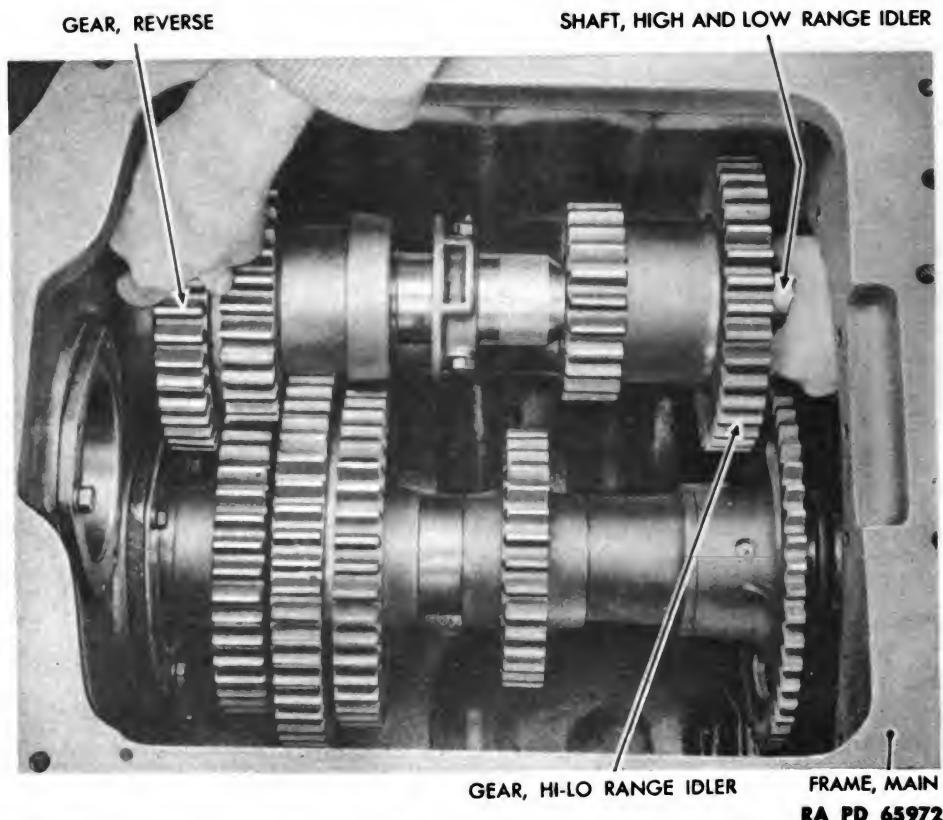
Hi-Lo Range Idler Shaft and Attached Gears Removal
